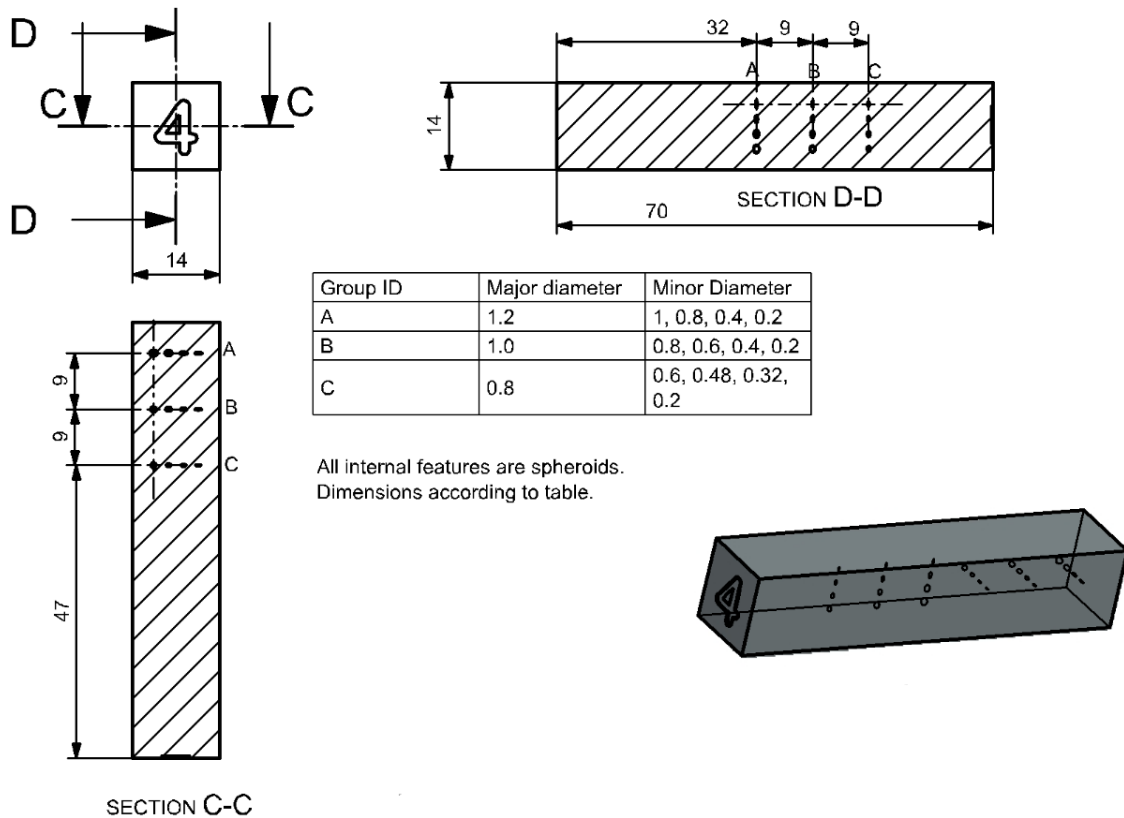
CAD drawing of IN 939 block 4 showing spheroidal defects.
